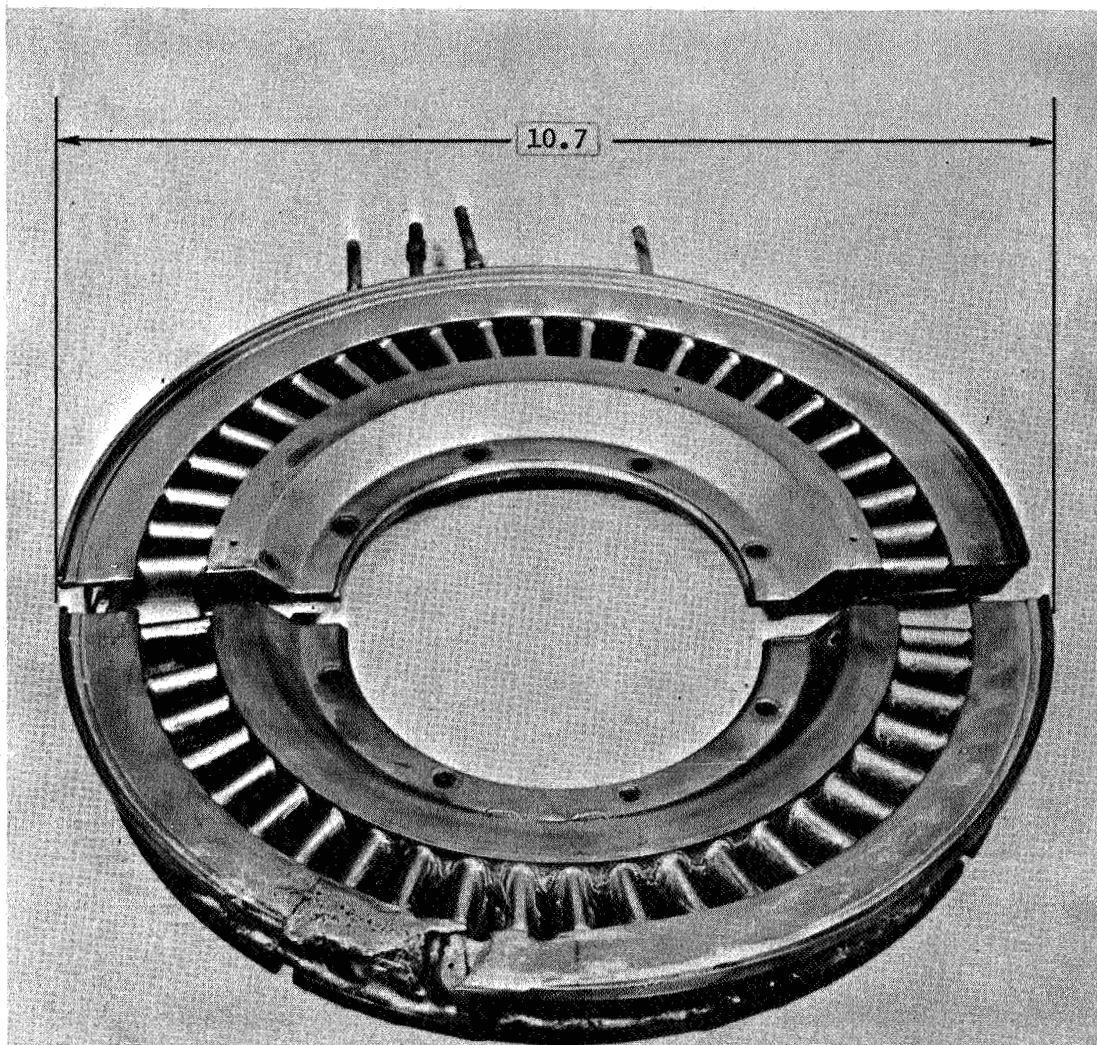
Second Stage Nozzle Diaphragm After Removal from Casing Following 35-Hour Turbine Checkout. (C64121805)
